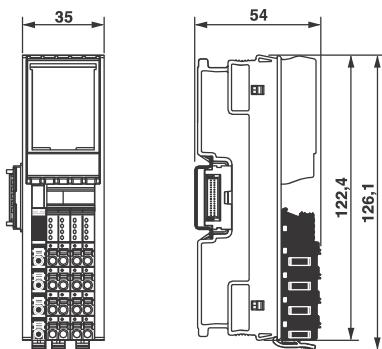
Nominal dimensions of the H housing with one terminal field
